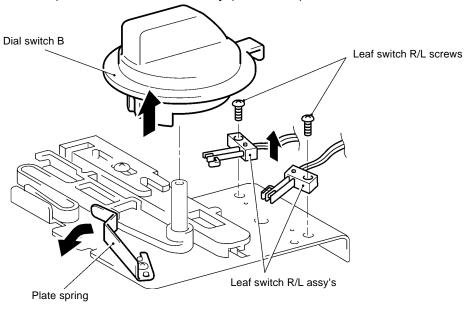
Disassembling the Dial Switch Holder Assy B (1)
